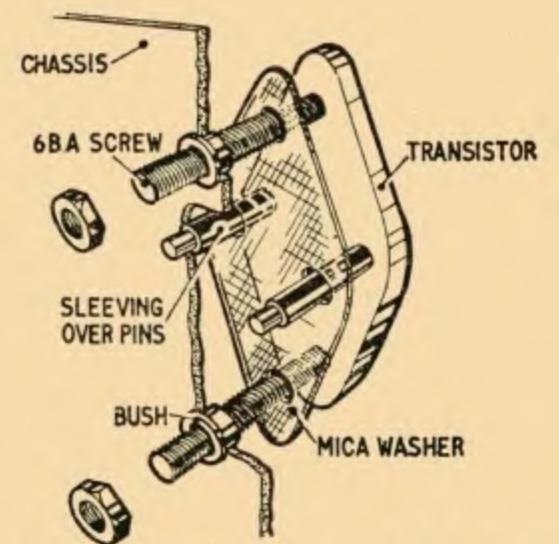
Exploded view of the transistor mountings showing the insulation bushes and washer
